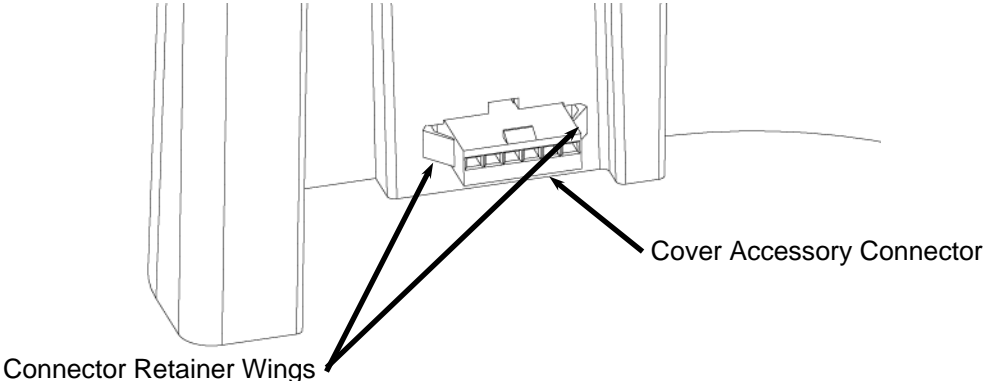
VIEW OF THE COVER ACCESSORY CONNECTOR
